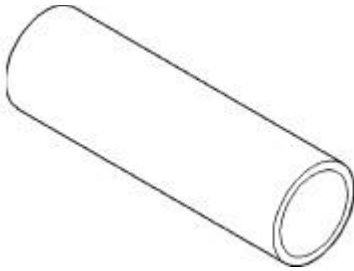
Crankshaft Seal and Sprocket Installer - 6780-1
